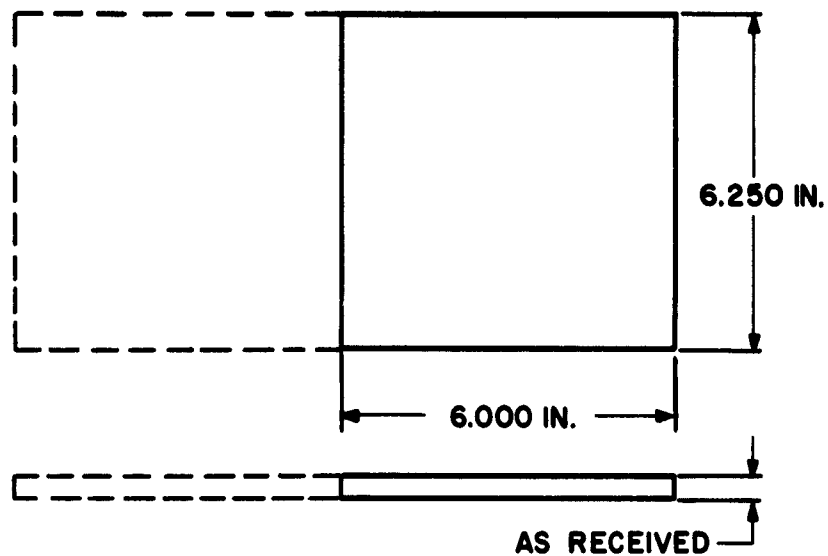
Final Butt-weld Specimen Drawing for Internal-Notch Tensile Evaluation (D6AC Steel and B120VCA Titanium)
